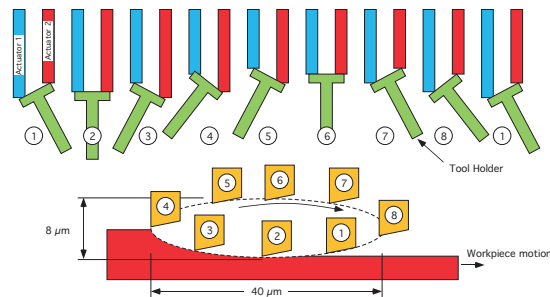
Elliptical motion produced by a pair of actuators and a T-shaped tool holder
